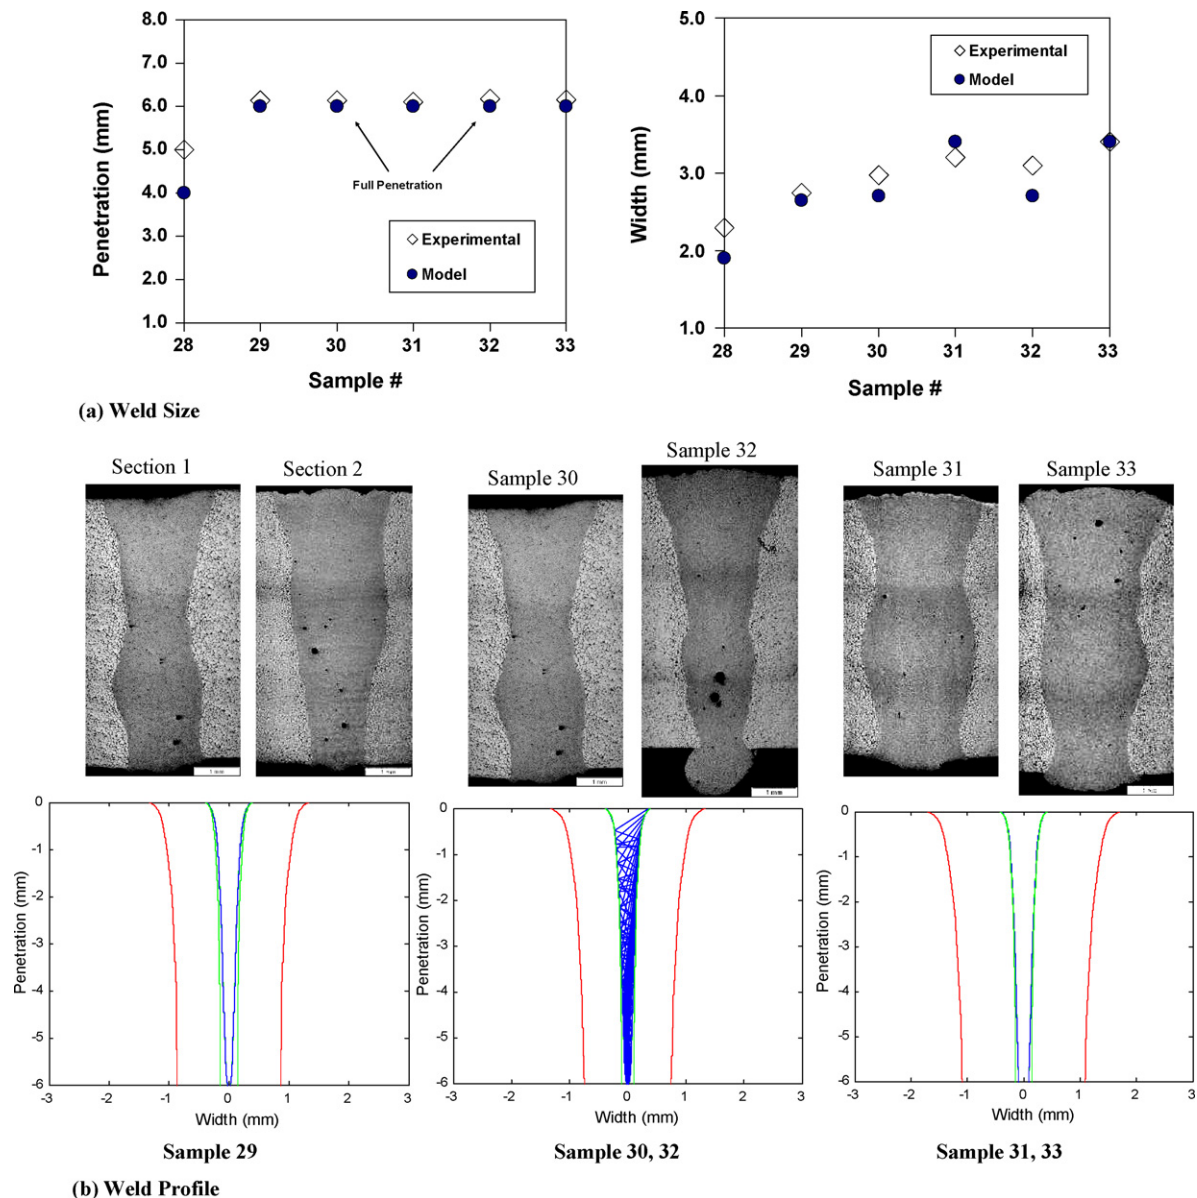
Comparison between the experimental results and the model for butt joints (6 mm) laser welded plates: (a) weld size, (b) weld.
